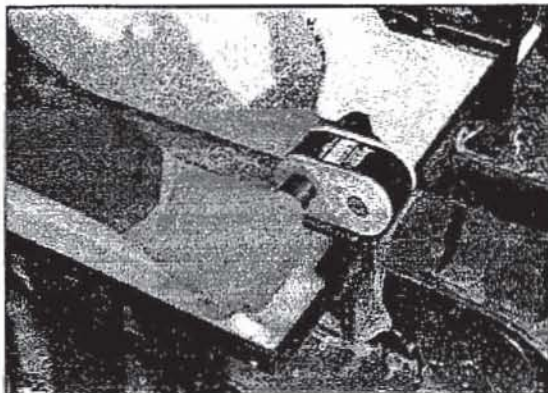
The DT325 Liner Cutter is used to safely make a longitudinal cut on the sample.
